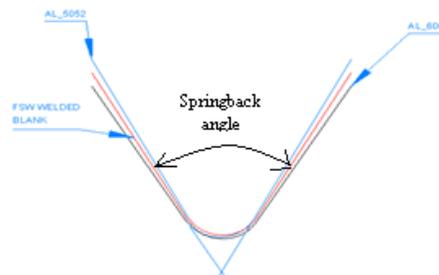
Representation of relative spring back of base materials and welded sheets
